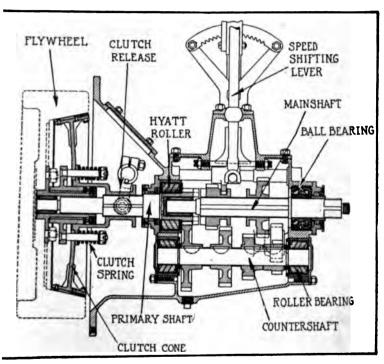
Sectional View, Showing Gear Box and Clutch Assembly, Porming Part of Unit Power Plant.
